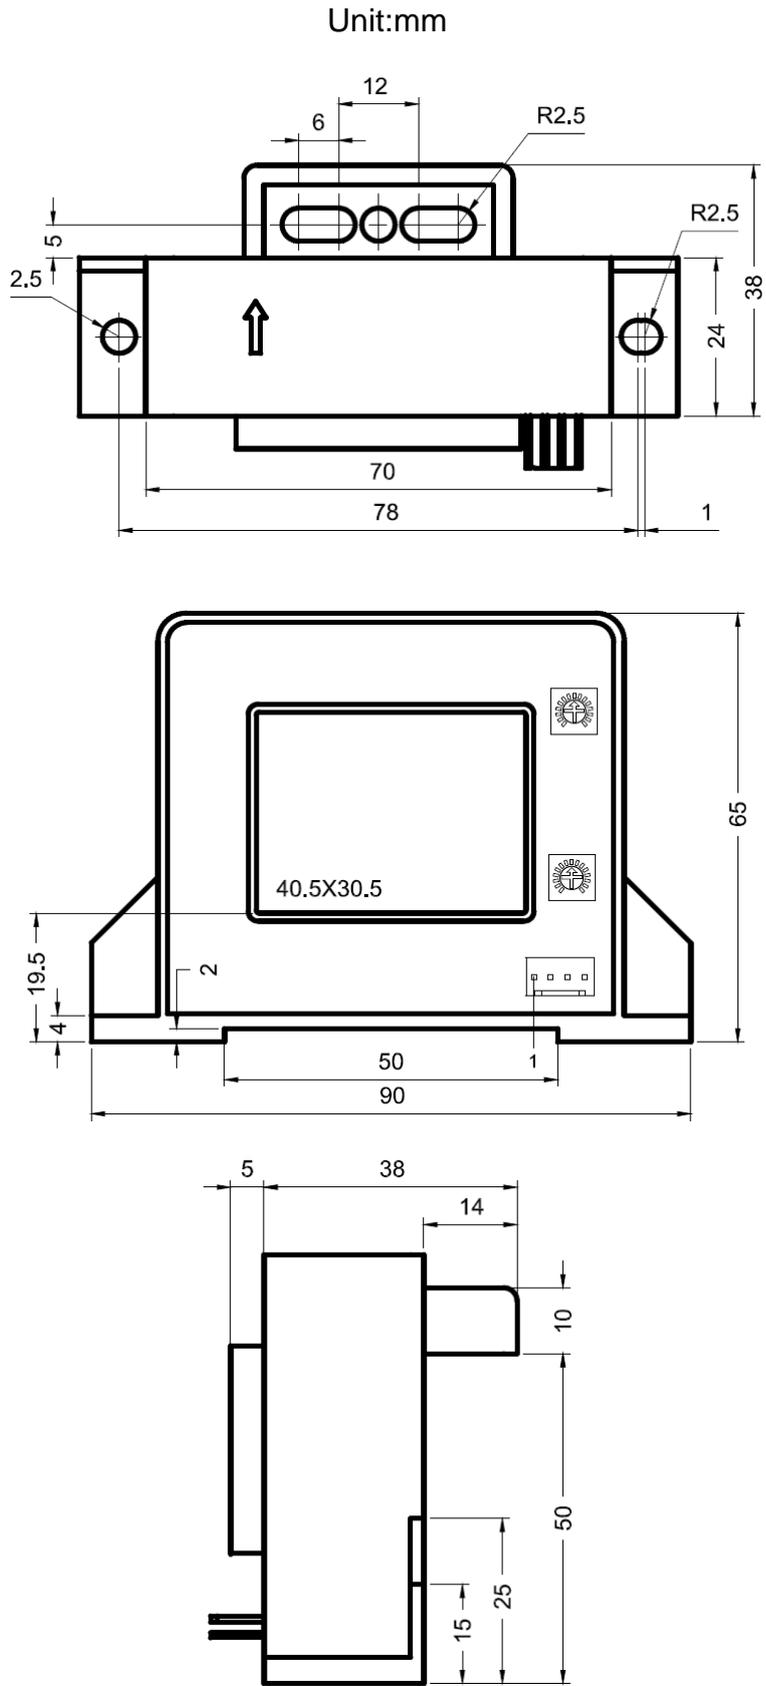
Hall CT Kit (HCT A Type) 200 ~ 1500A Dimension Drawings
